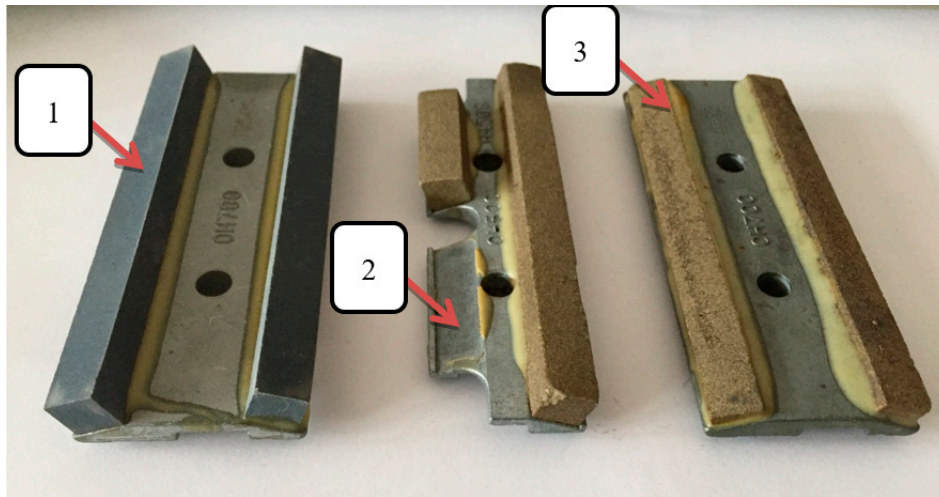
Machining tool: 1—new whetstone; 2—damaged whetstone; 3—worn whetstone.
